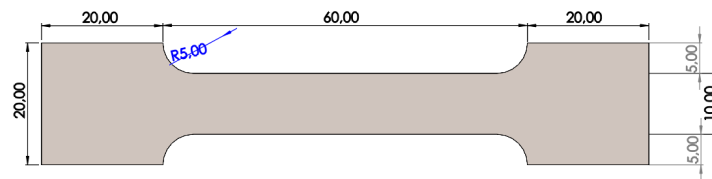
The dimensions of the beam used in the example to introduce the Finite Element Method. The out of plane width is 20mm.
